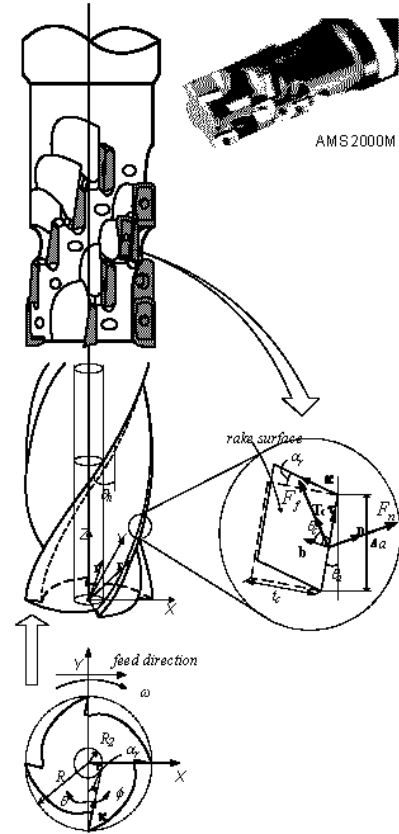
Cutter geometry of indexable end mill and cutting force components on rake surface.
